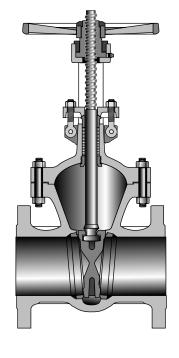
Flanged Figure 33½ Butt Weld
